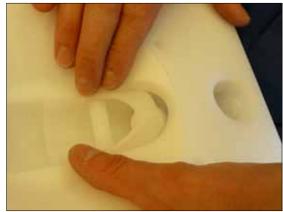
Mount the ball stop (22) in the lower sleeve (212) place the valve ball and push sleeve assembly.
